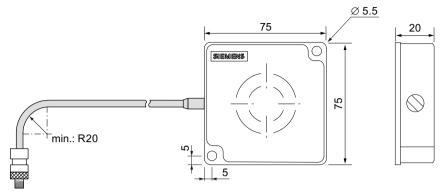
Dimensional drawing of ANT 1 (all values in mm)
